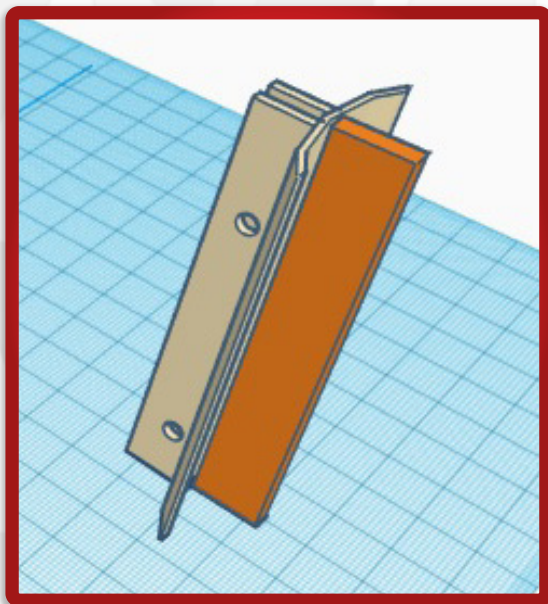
FIN ROOT ATTACHMENT TO ENGINE TUBE
